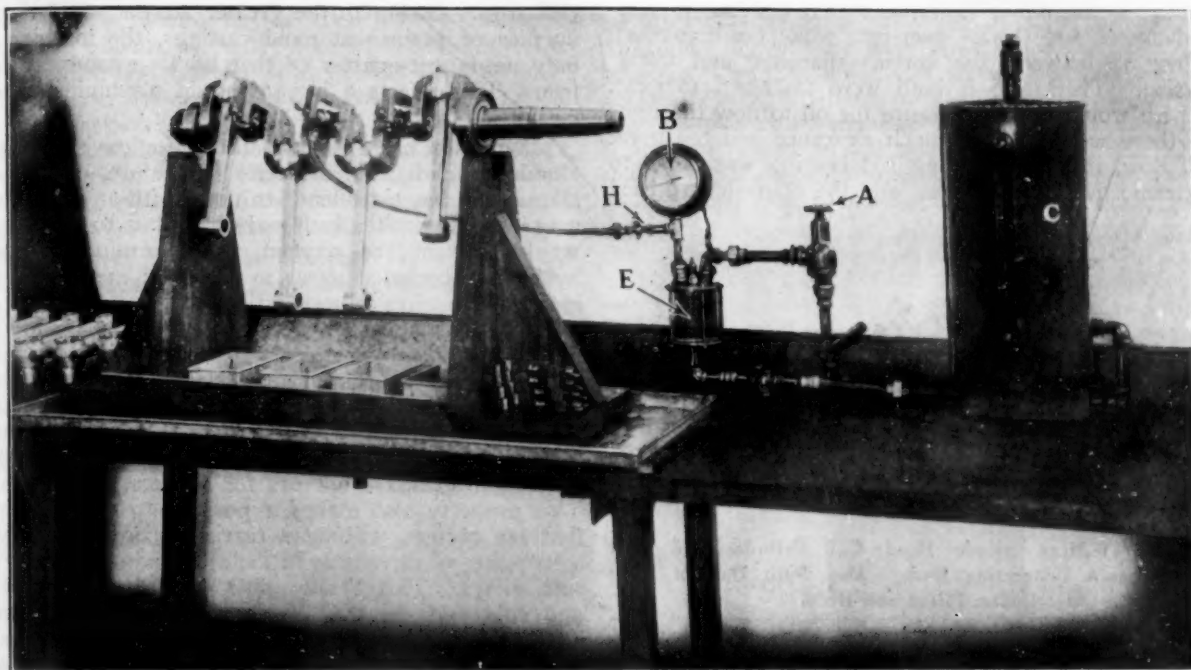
Crankshaft and Duralumin Connecting Rods Receiving the Oil Flow Test Just Before Final Assembly of Engine.
